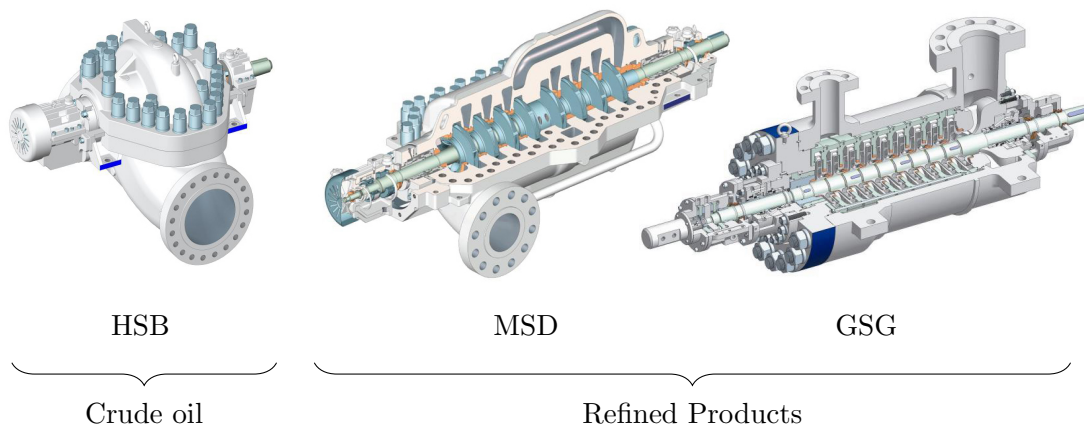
Typical Sulzer pumps used for oil pipeline applications
